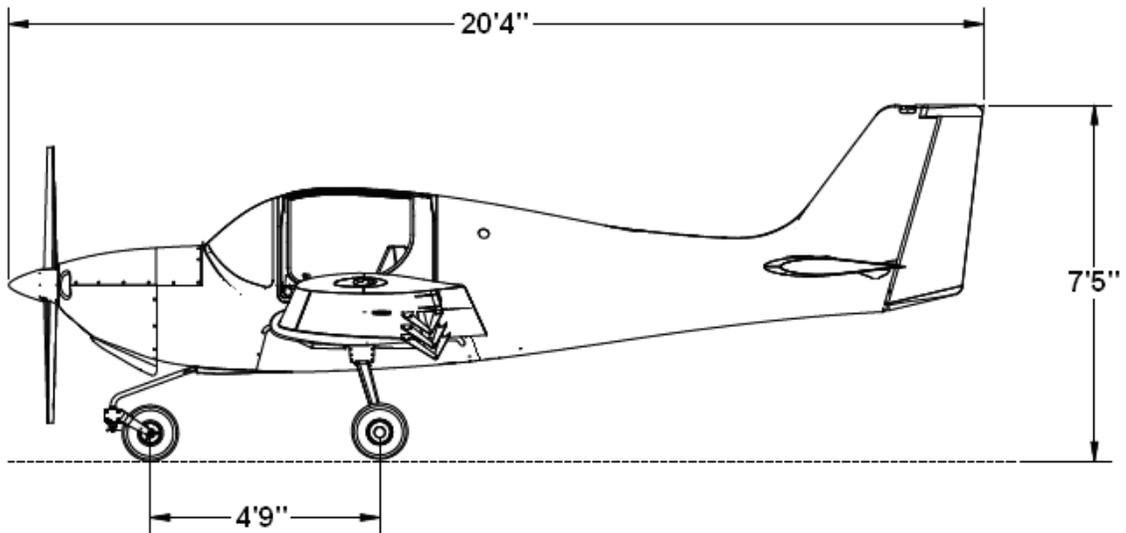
(Reference Only) Side View of Airplane Dimensions
